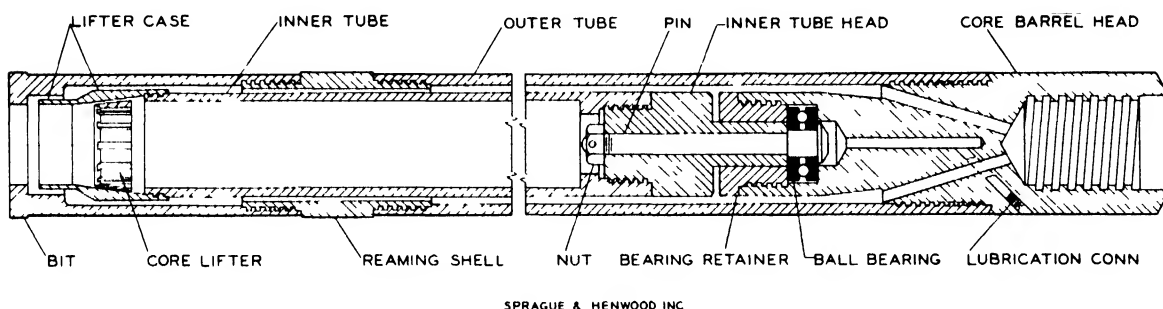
S & H SERIES "M" DOUBLE TUBE CORE BARREL
